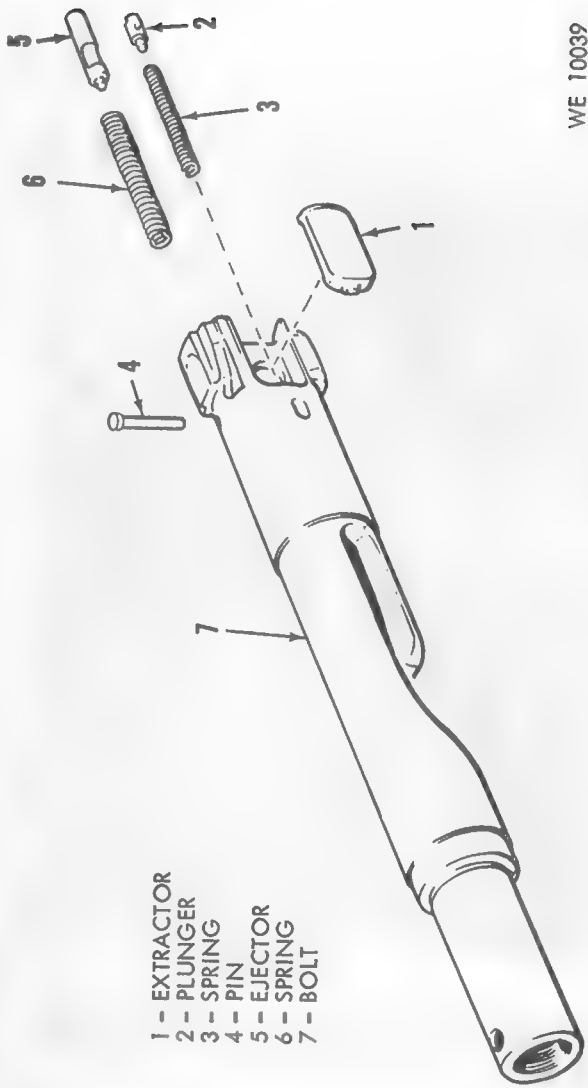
Disassembly/assembly of breech bolt assembly.
